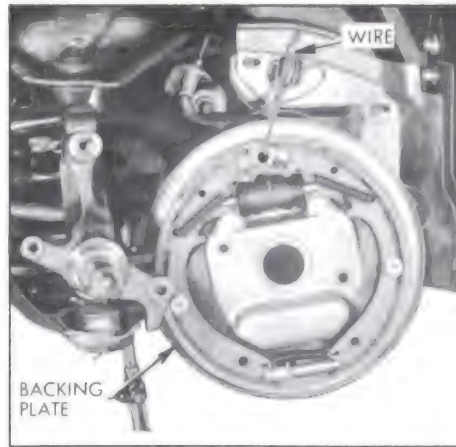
Wiring Brake Backing Plate Out of the Way
